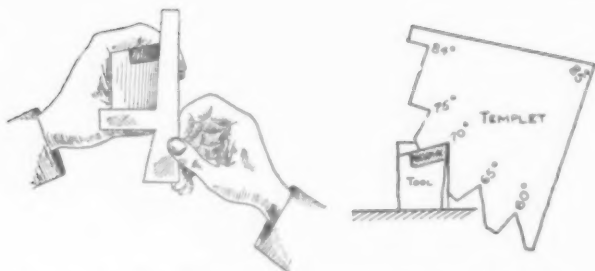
If much grinding to any particular set of angles is done, simple gages or templates may be used to advantage. The gage at the left is shown checking the clearance.
